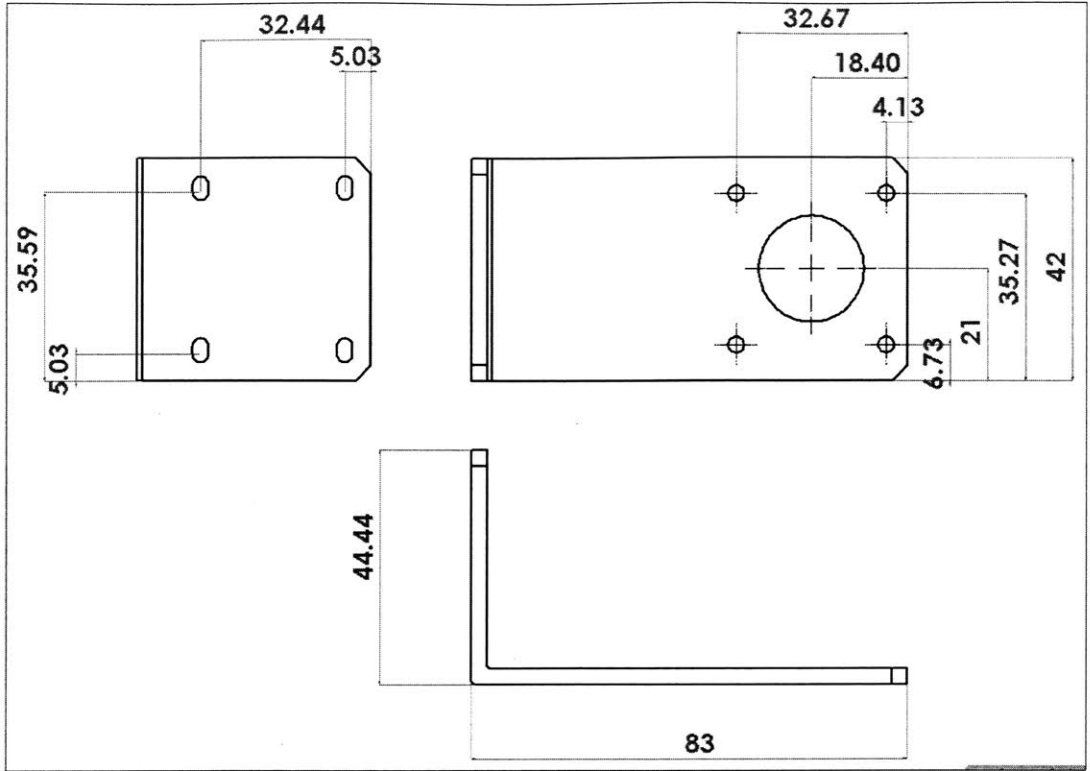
Motor L- sectional mount engineering drawing (Part 5G)
